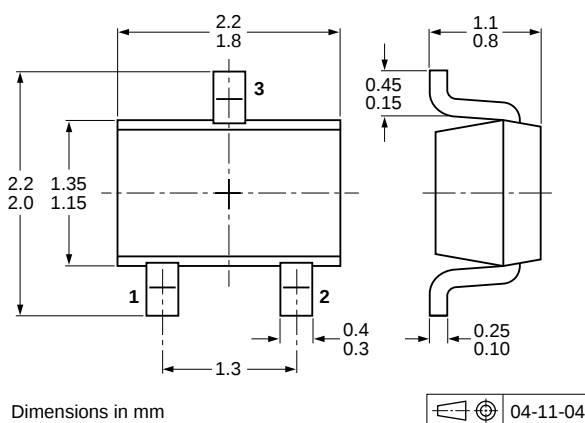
Package outline PDTA114EU (SOT323/SC-70)
